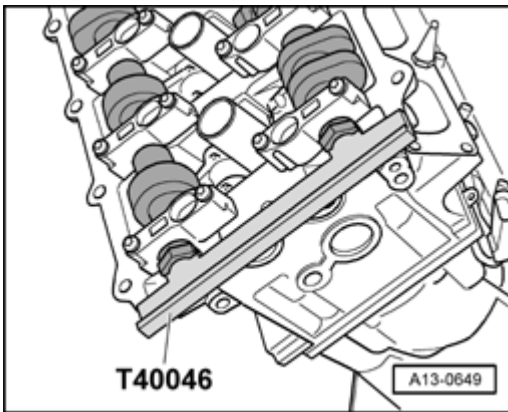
Removing/Inserting Camshaft Locator T40046 From/Into Camshafts Of Right Cylinder Head
